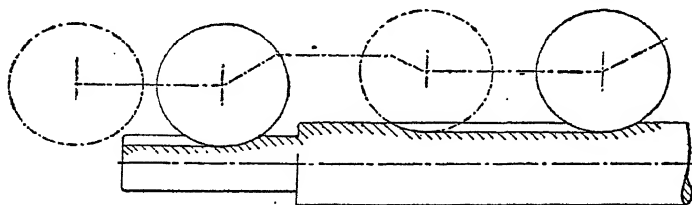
Diagram showing how cam and roller motion, causing the knee and table to rise and fall, enable the miller to be used for splining four shafts held side by side.
